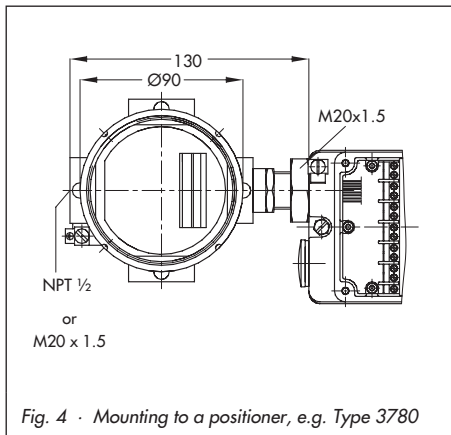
· Mounting to a positioner, e.g. Type 3780
